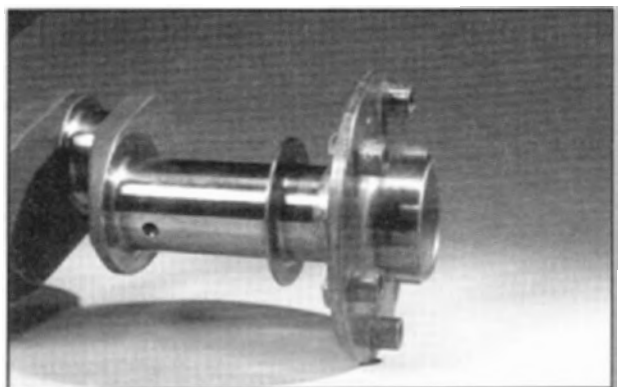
Before you remove a propeller from a flanged shaft, temporarily mark the propeller hub and flange. This makes it easier to position the propeller when you reattach it.
